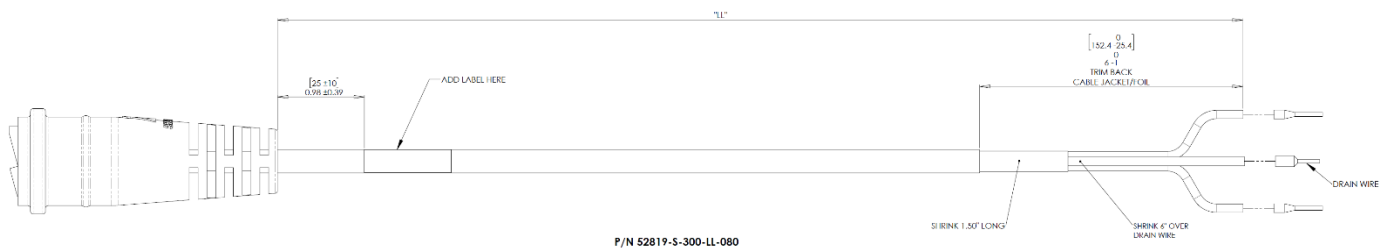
New lamp cable assembly 52819-S-300-LL-080
